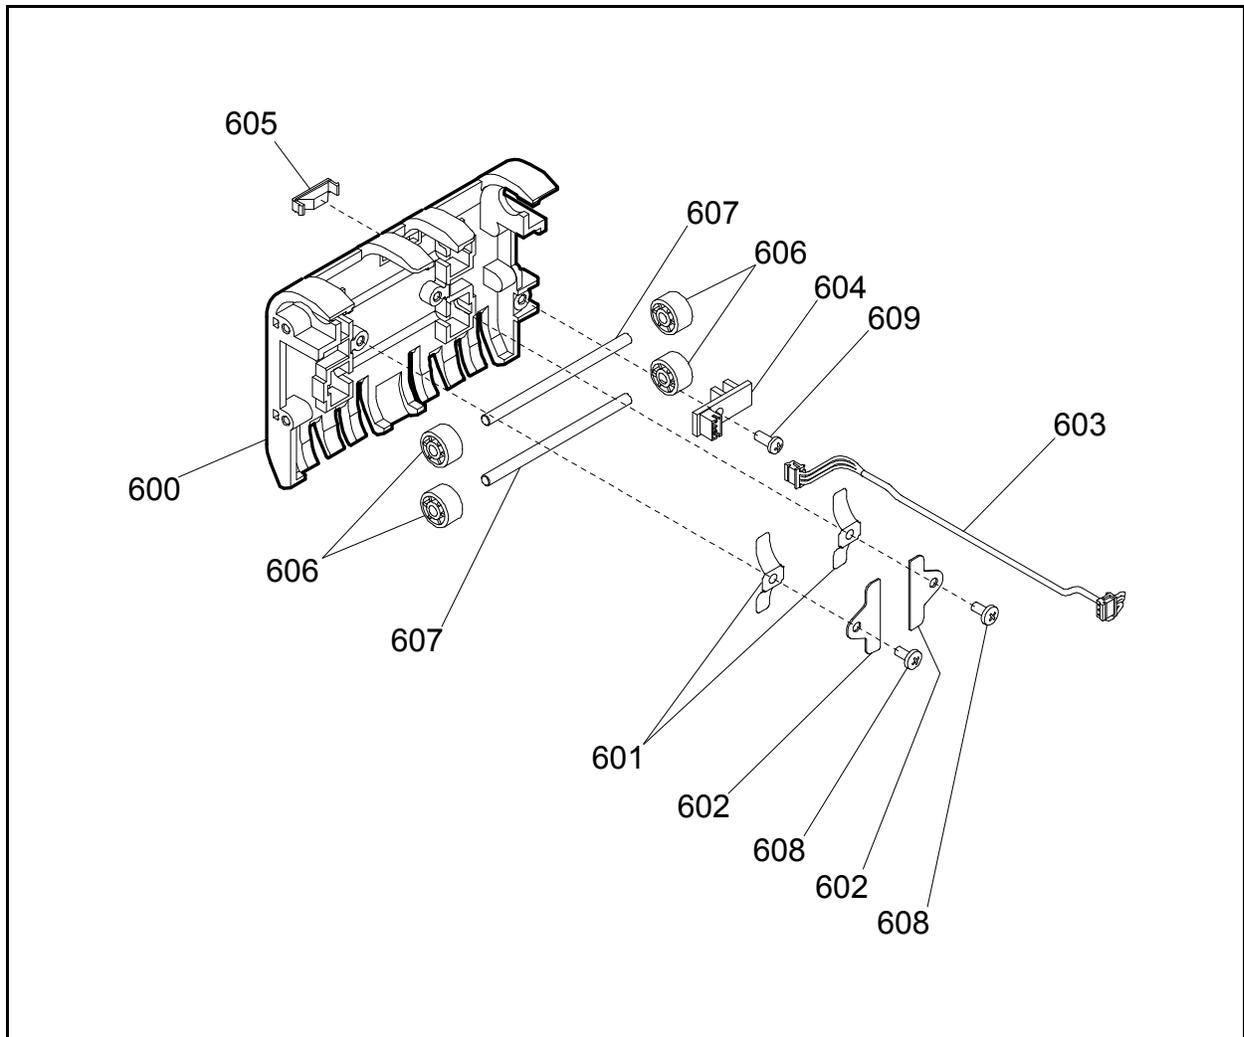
VEGA-RC Twin Upper Course Assembly Exploded View
